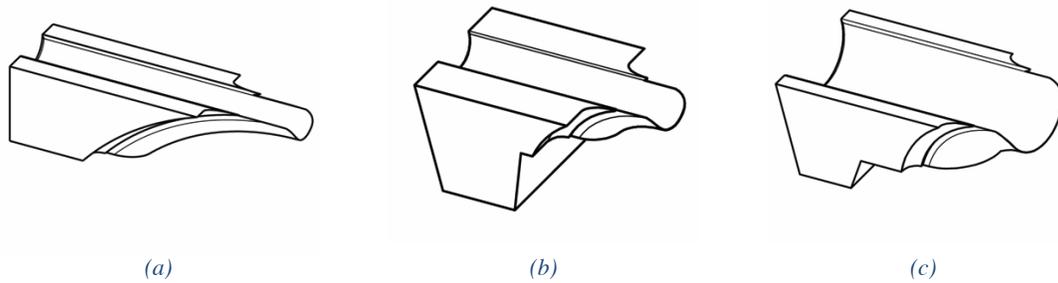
Families of wiper dies: a) small; b) medium; c) large
